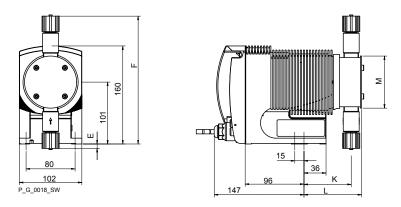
Dimension drawing gamma/ L, material version TTT - dimensions in mm
